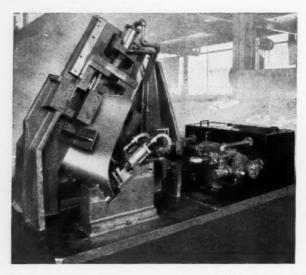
Four hings are pierced and the handle hole is pulled to a surface dimension in the chine.
